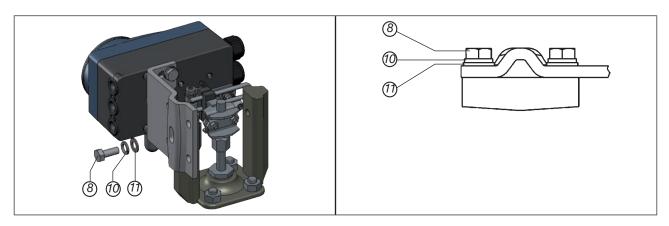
Attach positioner with mounting bracket; for actuators with cast frame
